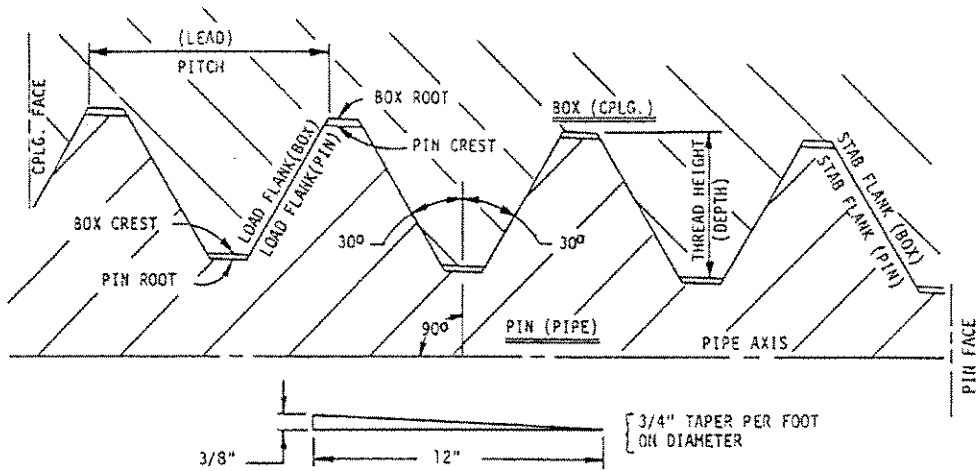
Thread Configurations [38,39], Line-pipe Threads
